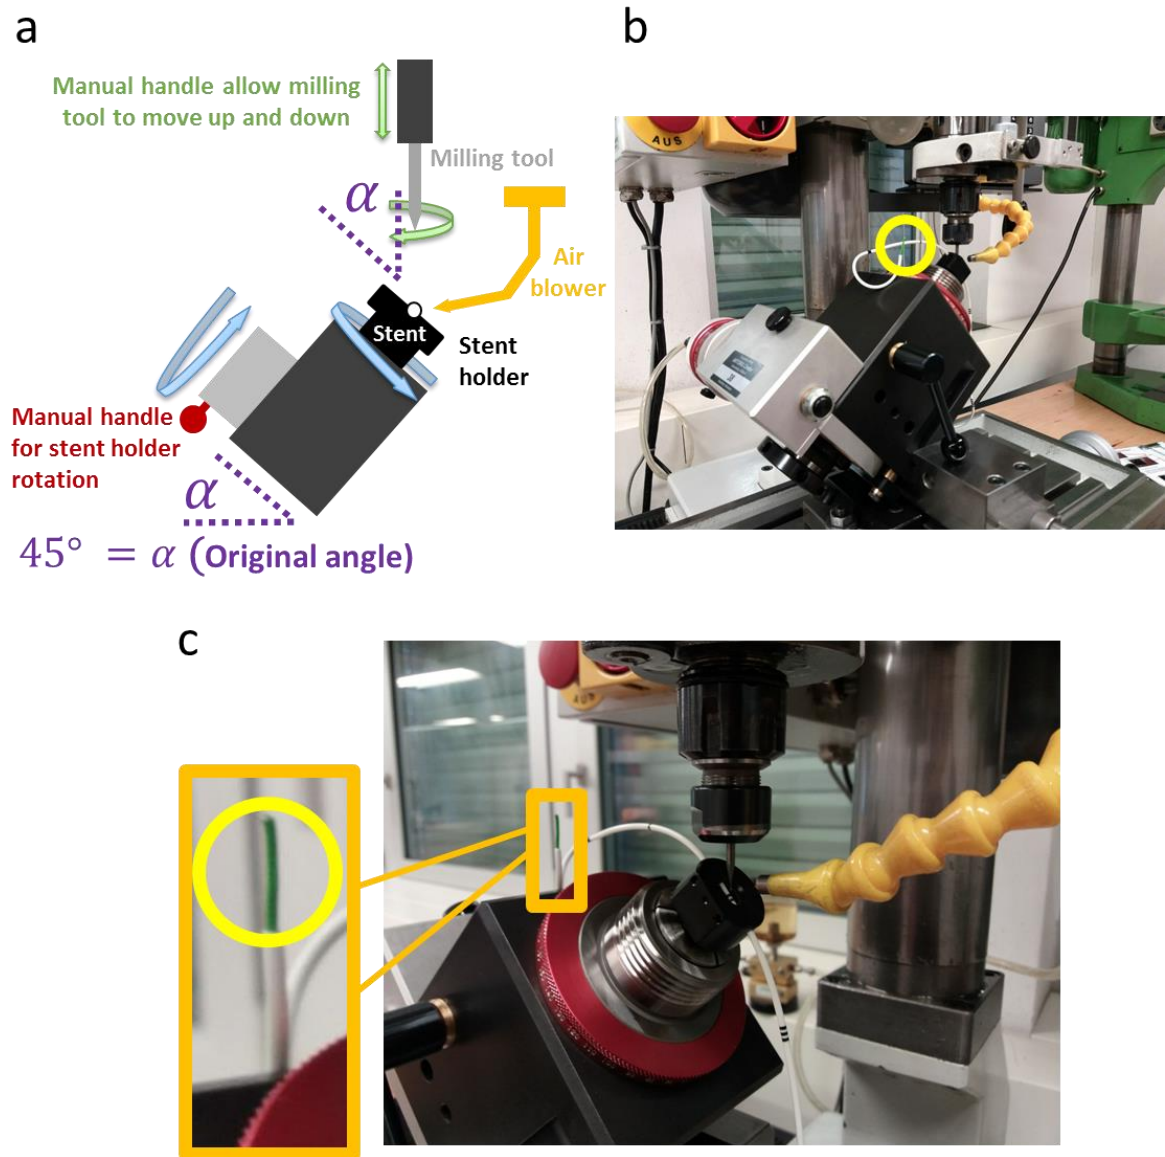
(a) Schematic representation of the milling setup used to fabricate triangular side-holes in stents. It comprises a milling tool (grey), a spindle to hold the tool (black), an air blower (orange) to remove debris during milling, the indexing head (grey) and its manual handle (red) for rotating the stent holder (black). The stent appears in white colour. The cutting angle ( $\alpha$ ) is also shown in purple. A photograph of the milling machine is illustrated in (b), with its integrated indexing head. The yellow circle highlights the supporting core inserted inside the stent, to achieve a better milling finish and prevent bending. A different view of the setup is illustrated in (c), with the inset showing a zoomed-in view of the stent (white) and the supporting core material (green).
